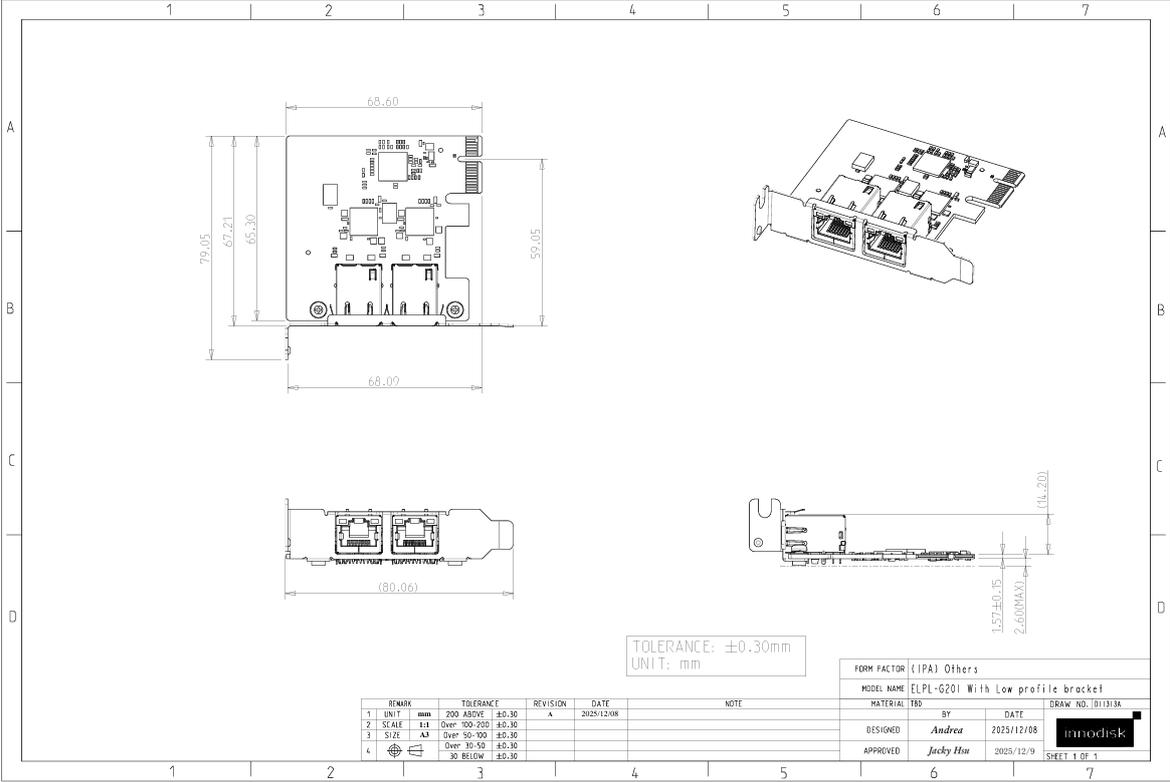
ELPL-G201 with Low-Profile Bracket PCIe Board Drawing
